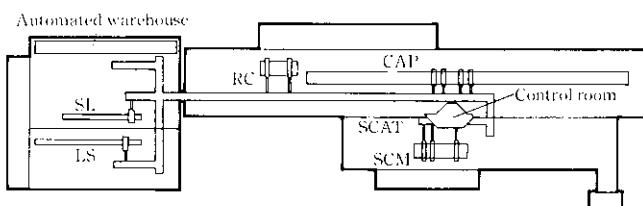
Layout of the cold mill and finishing plant for stainless steel
